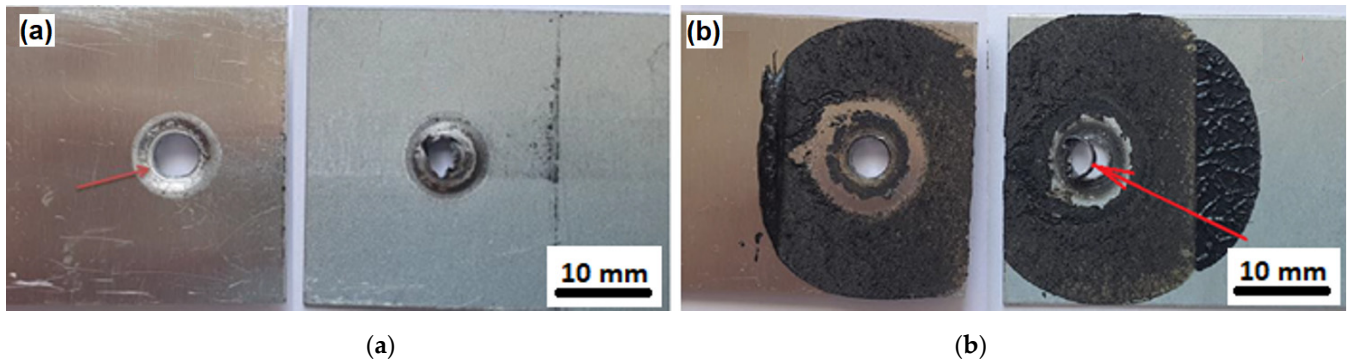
Fracture surface of TL-Al joint made by (a) FD, (b) FD + AB technology.
